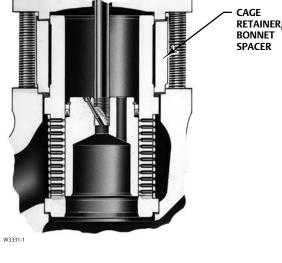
Fisher EWT Metal-Seat Valve with Whisper Trim I Cage
